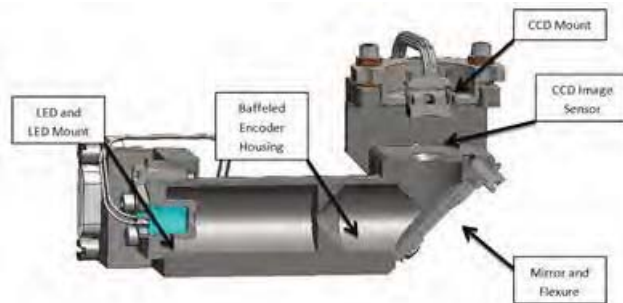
As-Built Mechanical Follower Wheel Assembly
